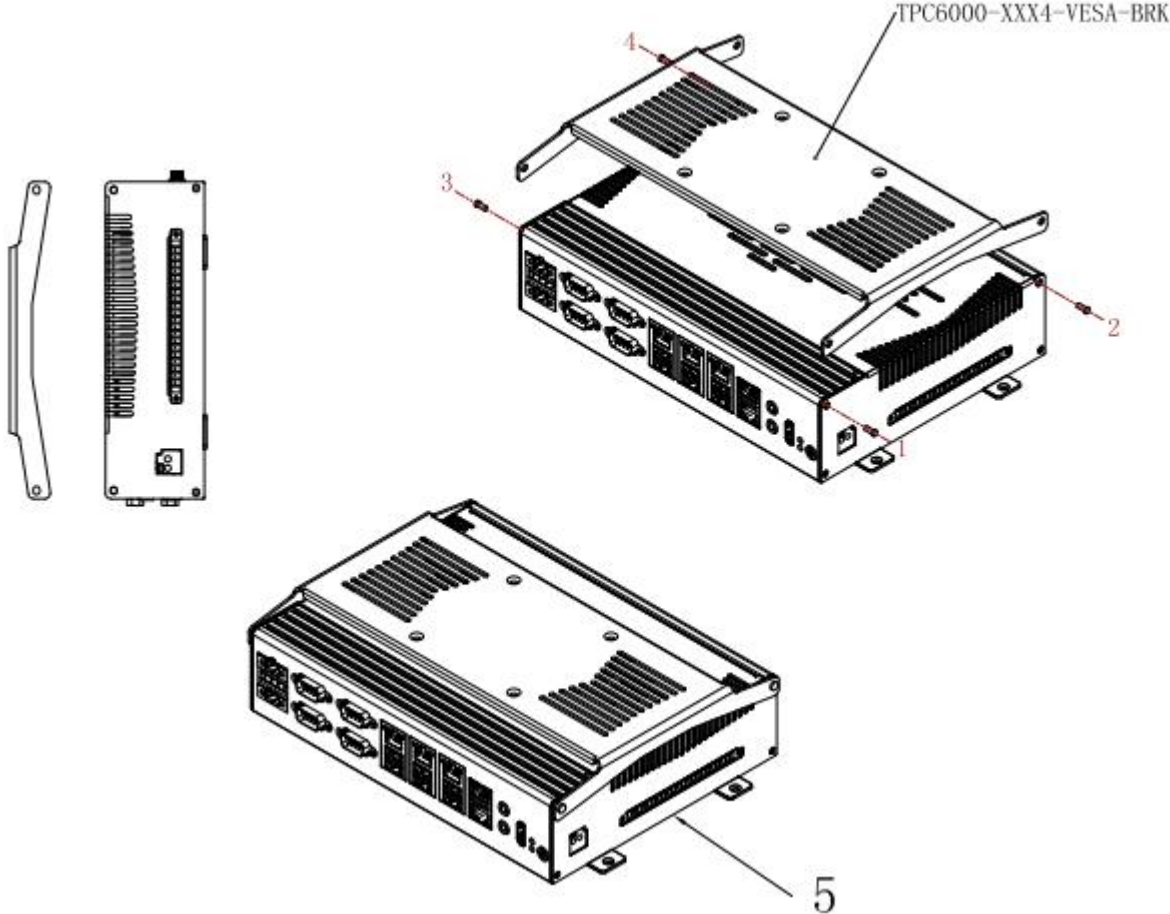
3 TPC6000-Cxx4 VESA installation
